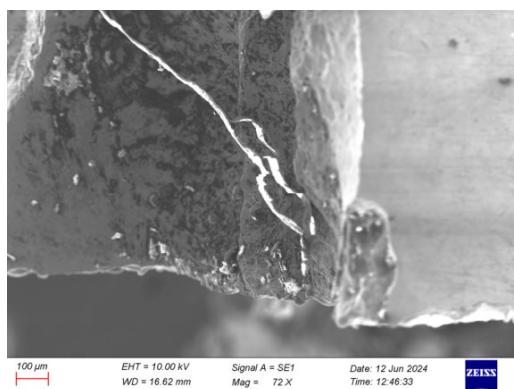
Analysis of cracks in the inner hole of roller No. 2 using an electron microscope
